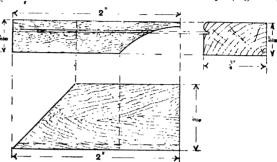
Plan, Elevation, and Section of Tray's Corner Feet.
